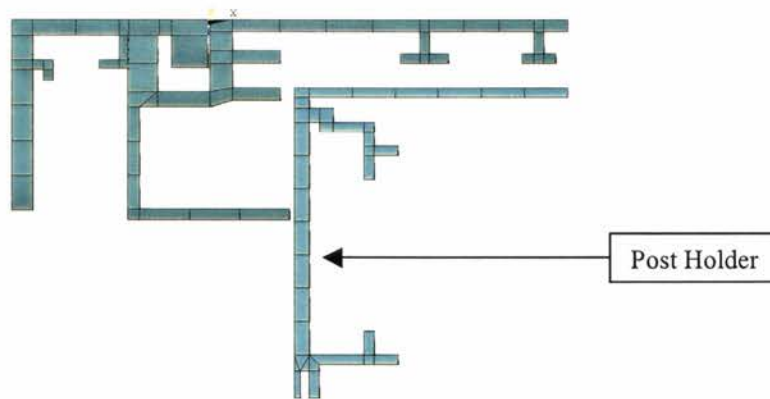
Cross-section of side part of the frame and post holder
